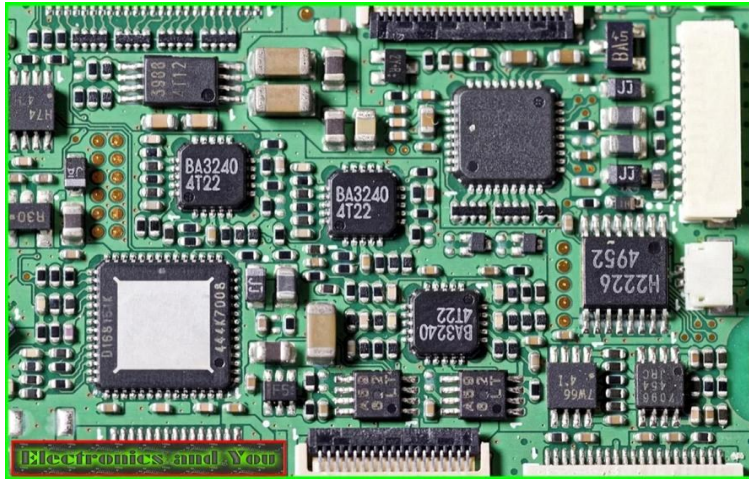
PRINTED CIRCUIT BOARD (PCB) BOARD
